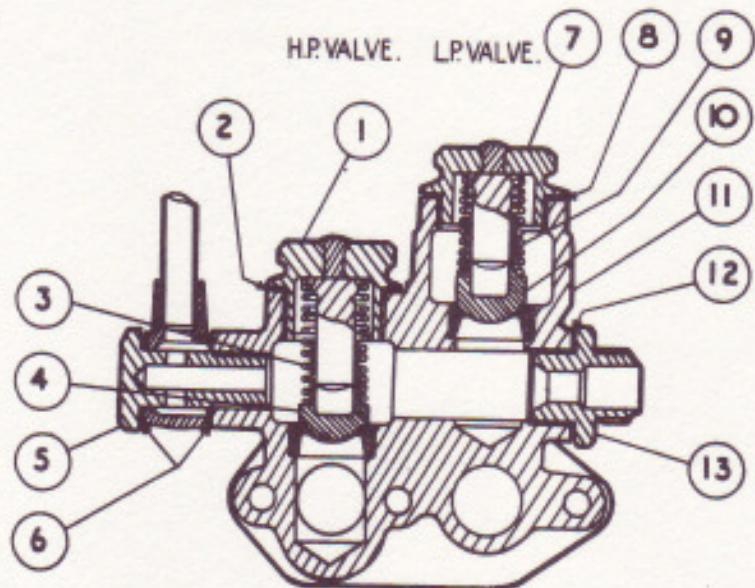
SECTION OF OIL PRESSURE RELIEF VALVE UNIT.
